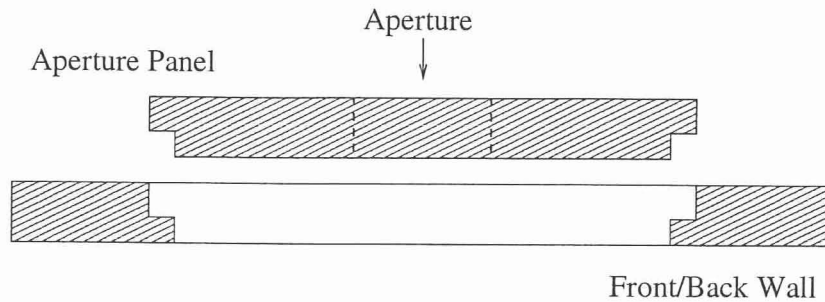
To accommodate multiple aperture configurations in the conducting enclosure, the front and back walls were constructed to accept flush-mounted aperture panels.
